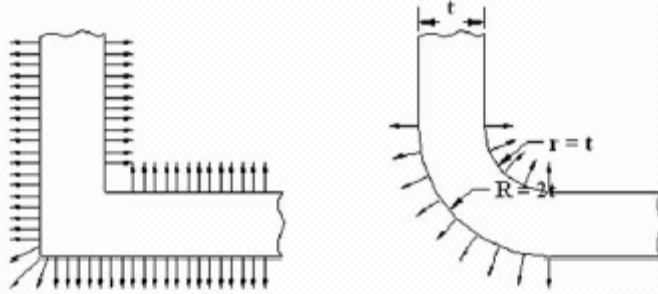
Direction of heat transfer from solidifying metal to mold
